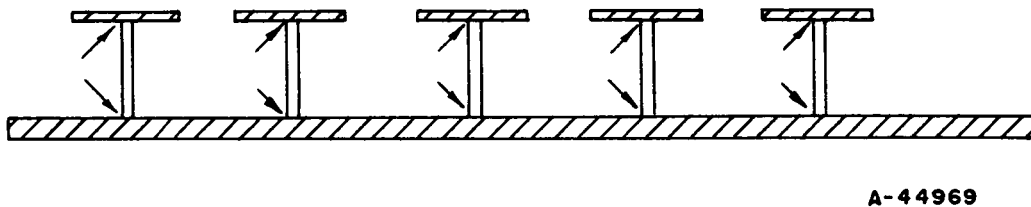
SECTION OF SKIN PANEL SHOWING PROPOSED USE OF HIGH-FREQUENCY RESISTANCE WELDING
